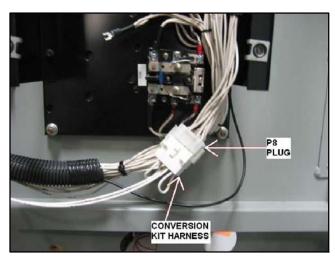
Connect Conversion Kit Wire Harness Connector P8 to Plug P8
